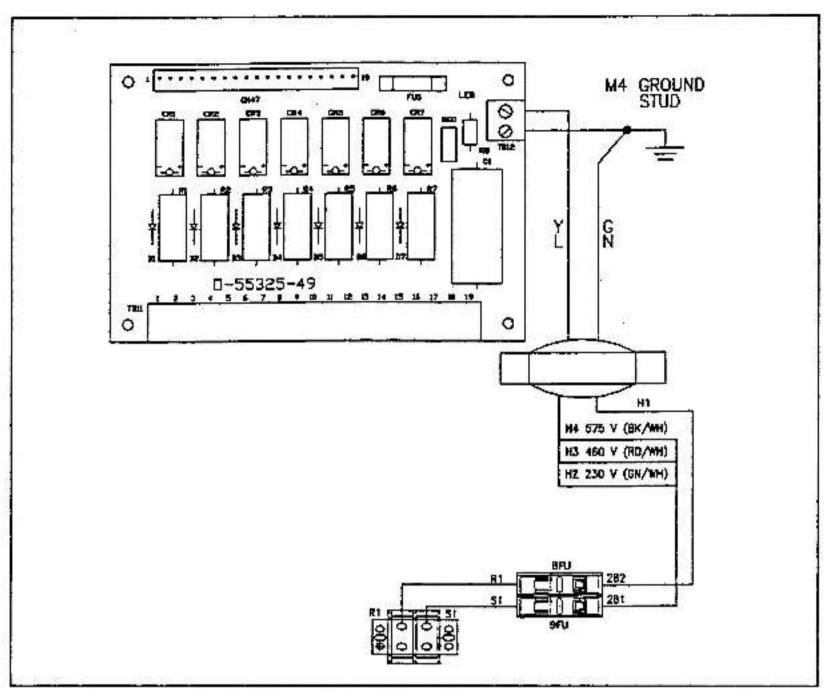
Control Signal Buffer PC Board Transformer Wiring Connections.
